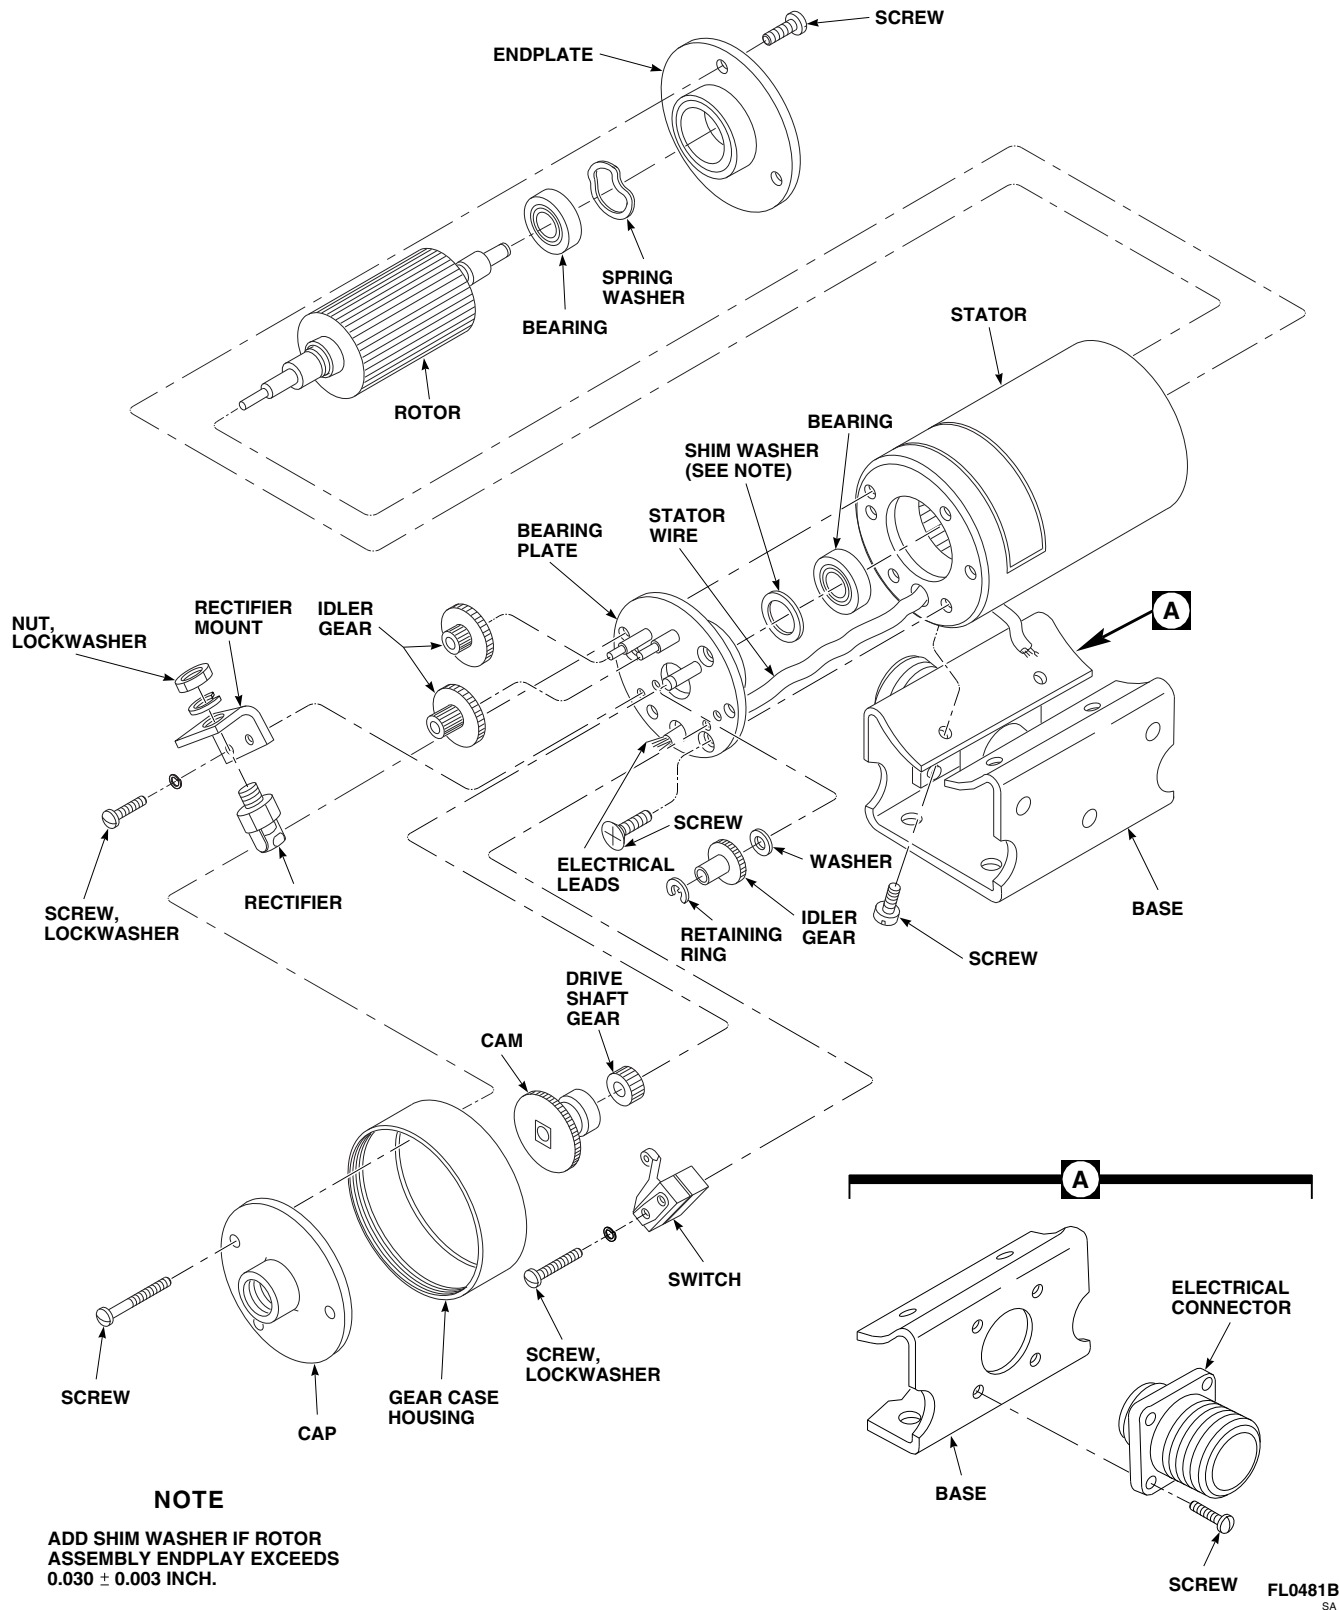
REPAIR WINDSHIELD WIPER MOTOR (BENCH)
